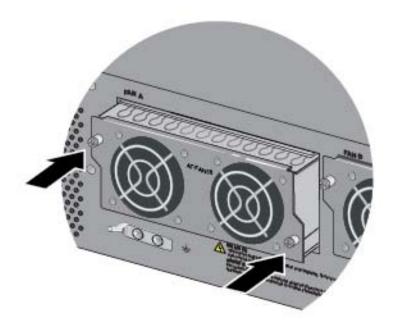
Seating the AT-FAN08 Module on the Connector in the Chassis
